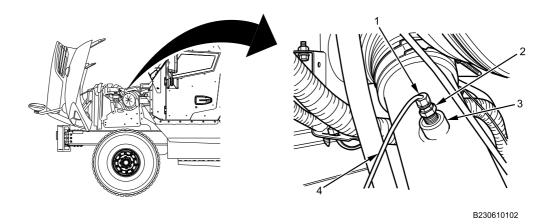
Ether (Cold) Start Valve Tubing and Atomizer Jet Assembly.
